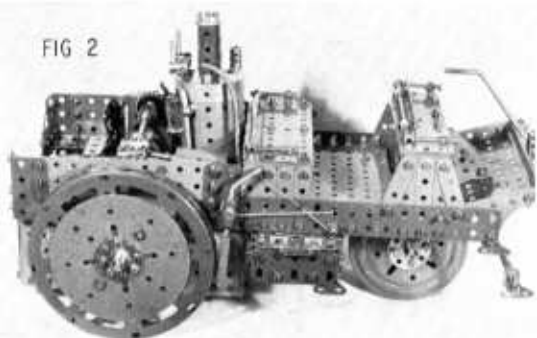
An Experimental Steam Carriage model makes use of Hub Discs, Circular Plates and flanged discs for scale wheels.
